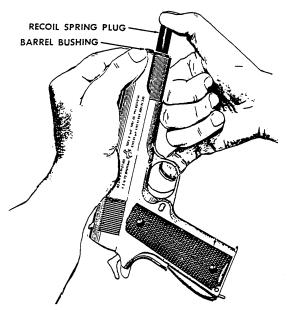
Recoil spring plug removal from the recoil spring.
